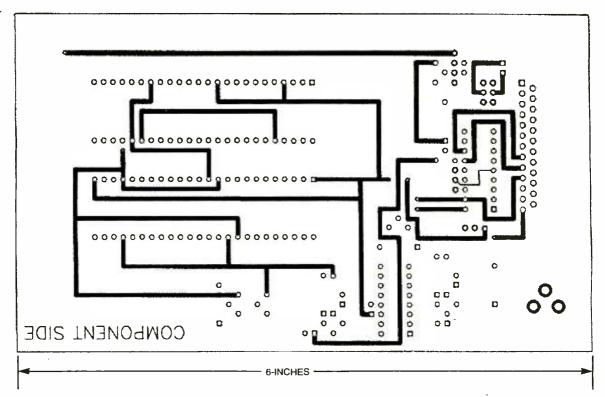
Although the PIC Replicator can be built on a piece of perfboard, a PC board makes for a more robust unit while reducing wiring errors.
